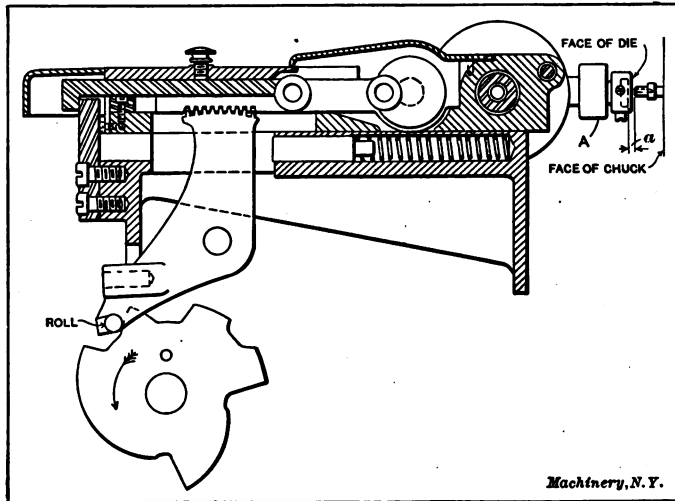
Position of Roll on Thread Lobe when setting Die or Tap
